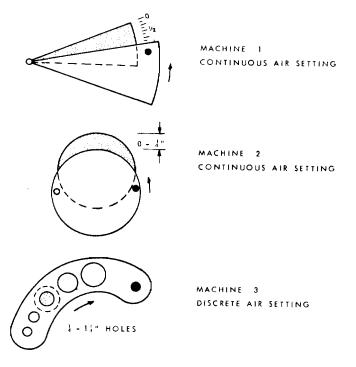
FIGURE I ADJUSTMENT OF AIR SETTING IN THE THREE TESTED MACHINES
